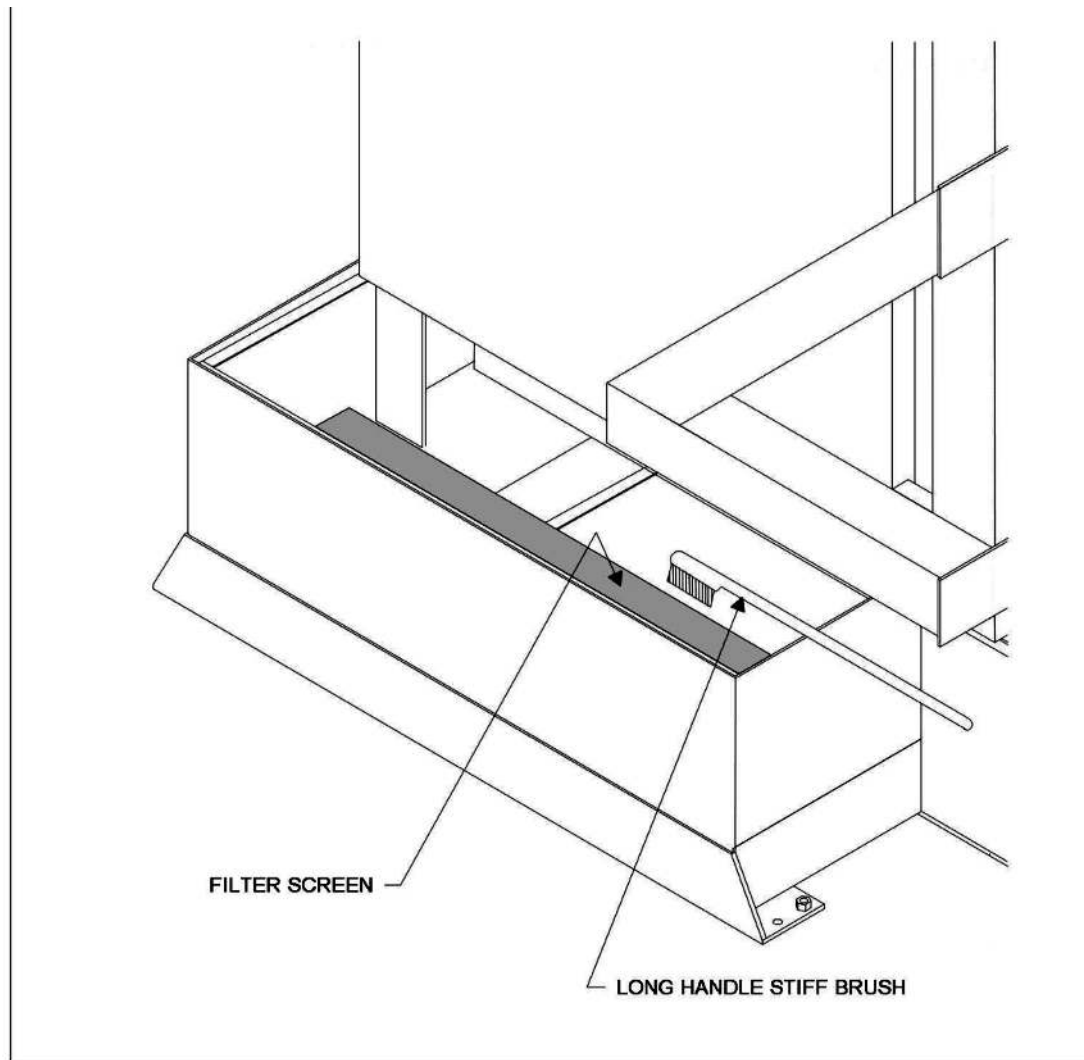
2: Cleaning the Pump Intake Filter Box
